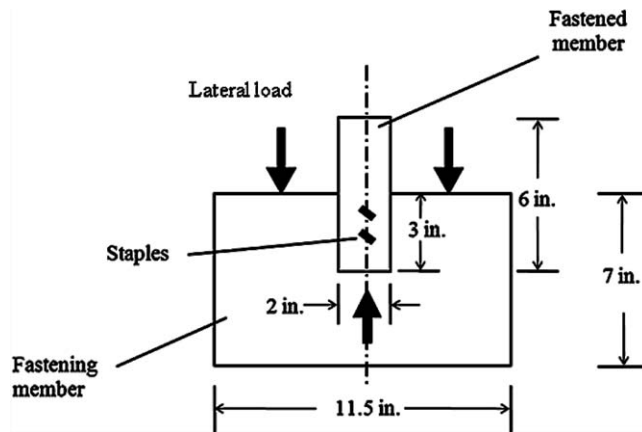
The general configuration of a face-to-face staple-connected joint specimen. 1 inch = 25.4 mm.
